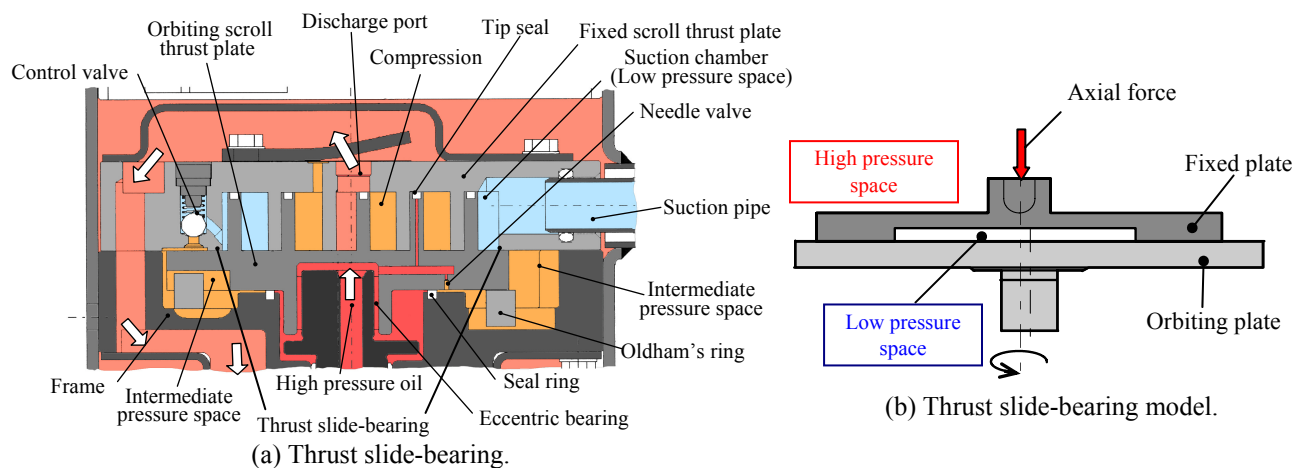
Thrust slide-bearing of a scroll compressor and its model for lubrication tests.
